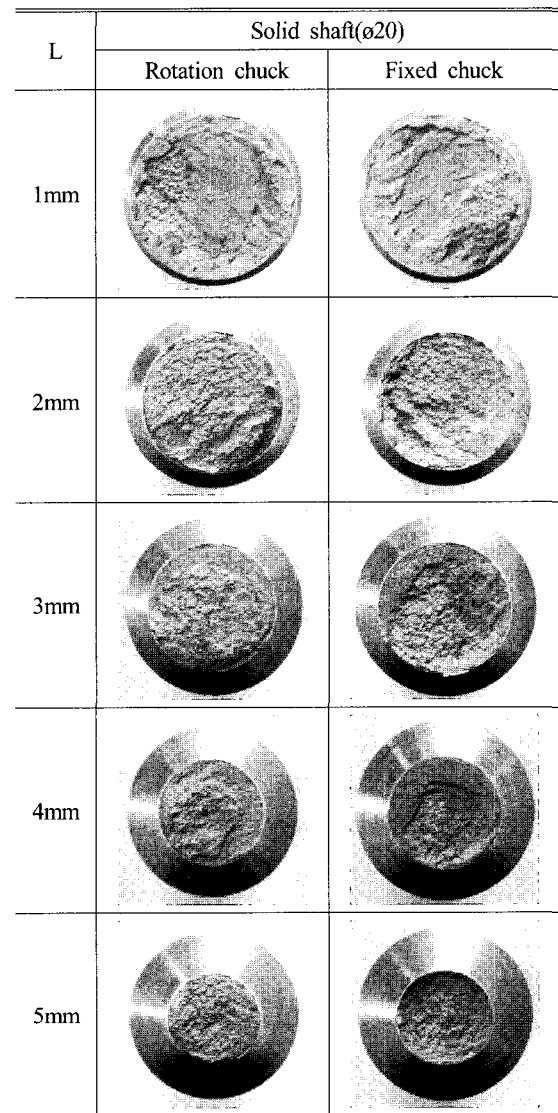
Tensile fracture surfaces of friction welds (Solid shaft)
